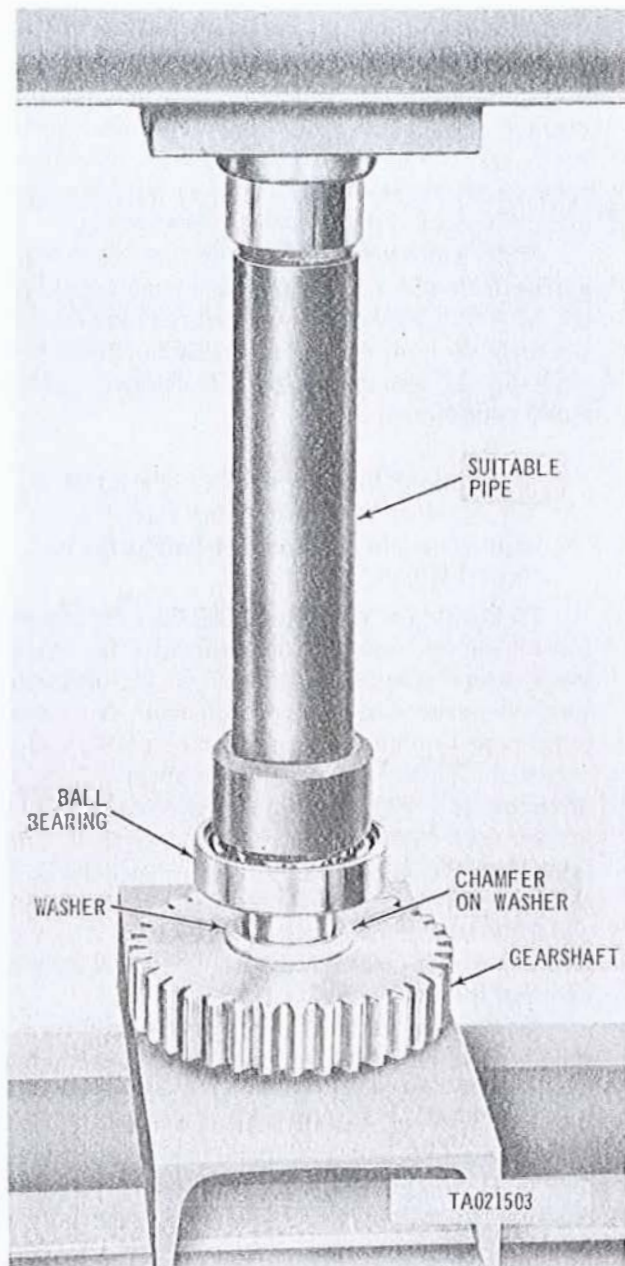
Pressing driven gearshaft ball bearing on spur gearshaft.
